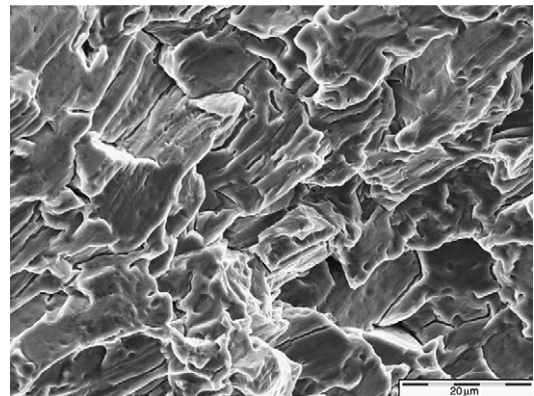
Fracture surface appearance of FSW weldment of AZ31.⁷⁹
